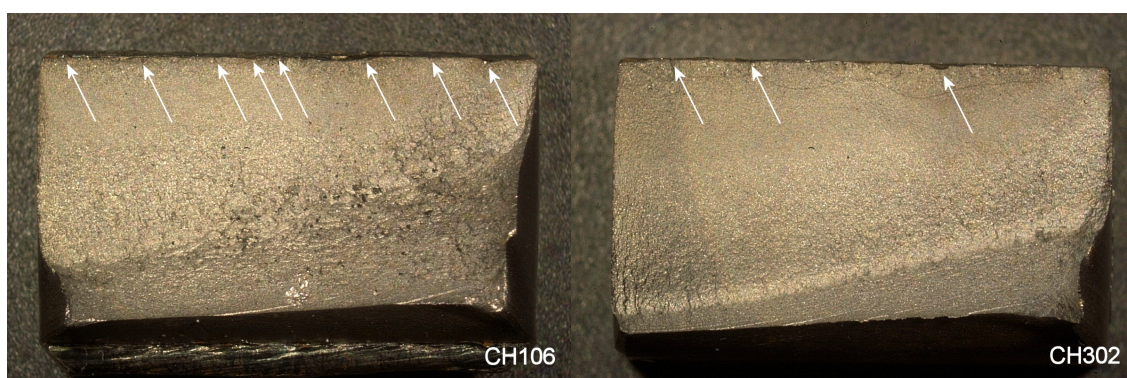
The fracture surfaces of Hybrid LF specimens tested by high (left) and low (right) loading. Arrows show crack initiation sites (Gribenberg 2003).
